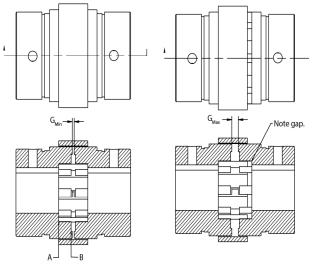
Proper Shaft-to-Hub Engagement 5. Install the second hub with the insert in place. This will set the hubs at the minimum hub gap (GMin) dimension, ensuring proper clearance. For specific GMin and GMax dimensions see Table 5-4.
